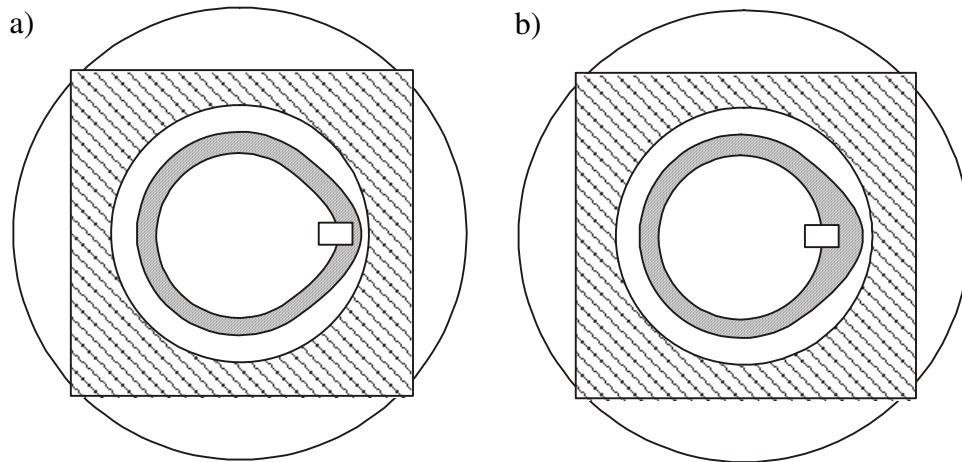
Roll neck a) or bearing bushing b) modified to provide the run-out needed for the compensation for sleeve spring.
